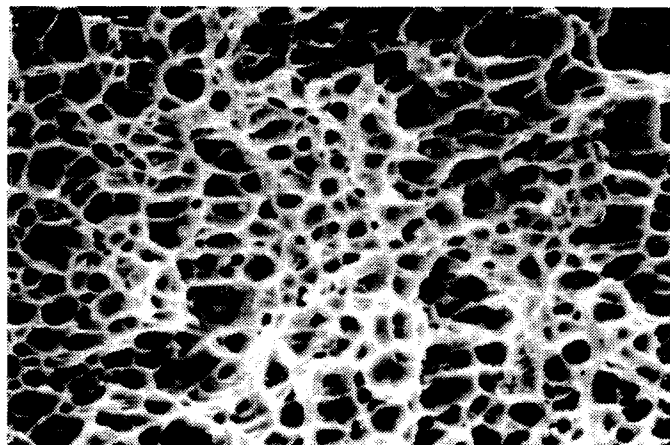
Crack Propagation Through Weld Pass Interfaces
